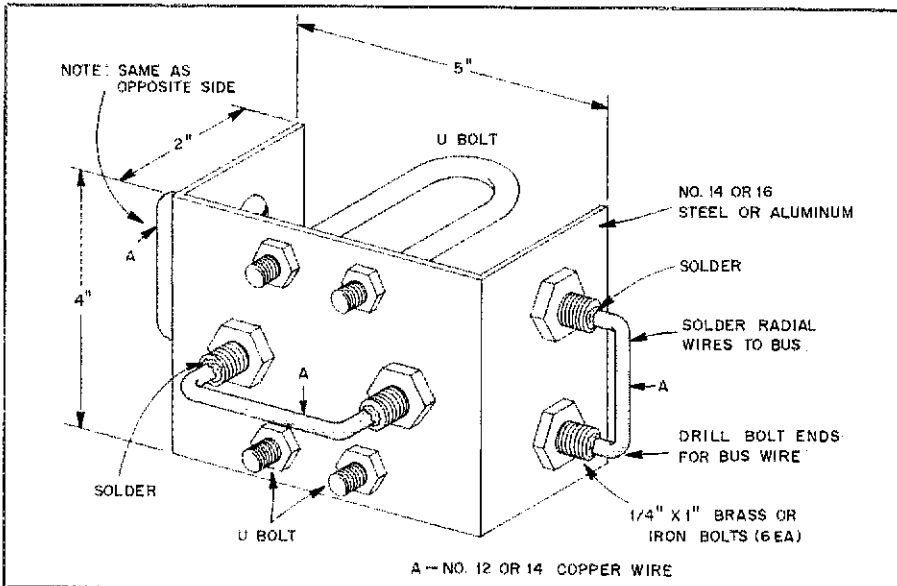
Details for the ground-radial block. The radial wires are soldered to the U-shaped bus-wire loops on the front and sides of the bracket. The ends of the 1/4-inch-diameter bolts are drilled to accommodate the bus wires, which are soldered to the bolts.
